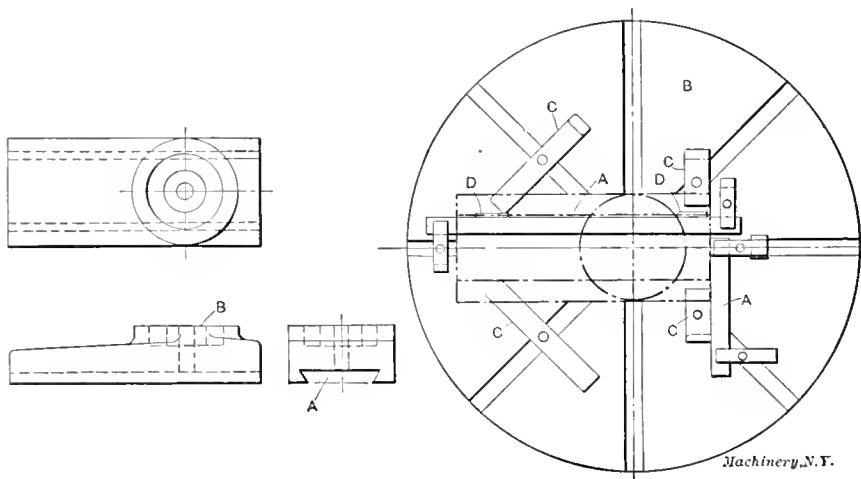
Milling Fixture in which Work is Located from a Previously Bored Hole.
